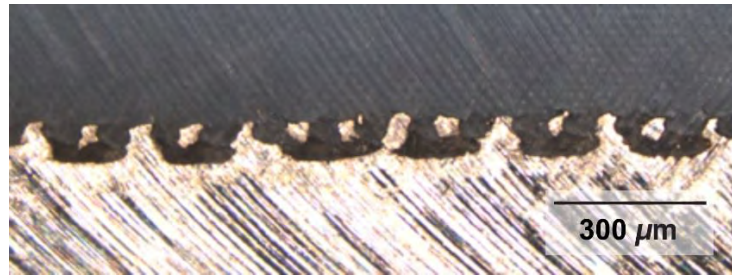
Cross-section of interlocking layer molded with UHMWPE
